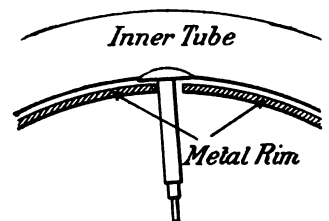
Showing necessity for care in adjusting dismountable rim.
